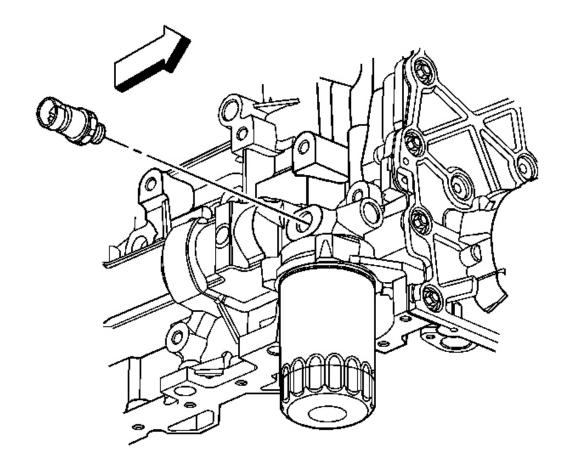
View Of Engine Oil Pressure Switch Courtesy of GENERAL MOTORS CORP.
